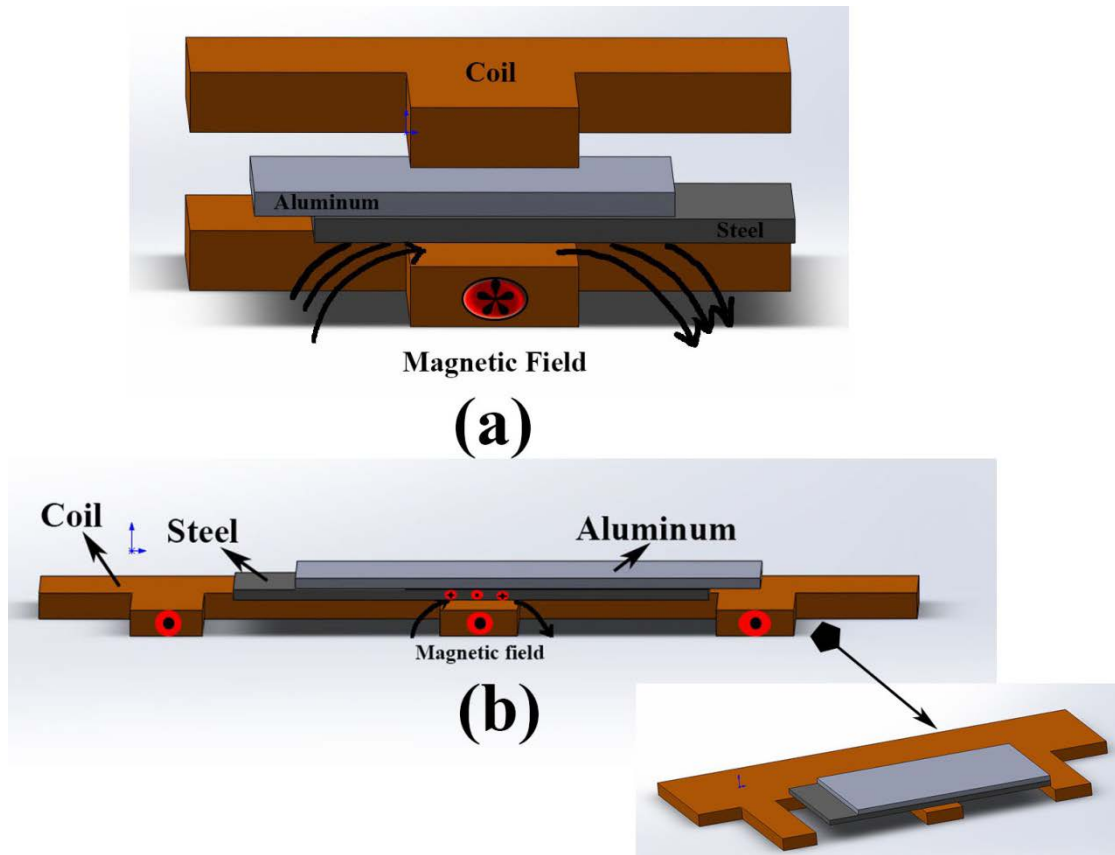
The coil designs for the magnetic pulse welding (a) T-shape and (b) E-shape [14].
